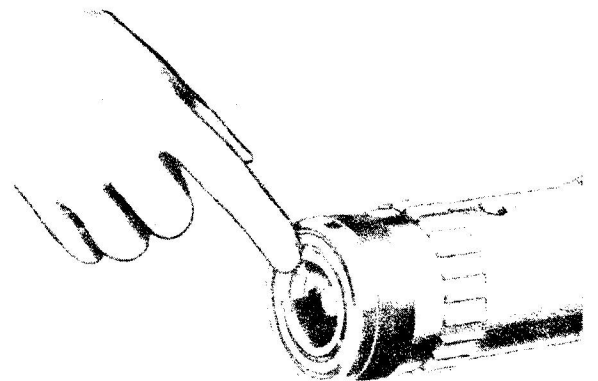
Checking Shaft Breathing Type Oil Transfer Plate
